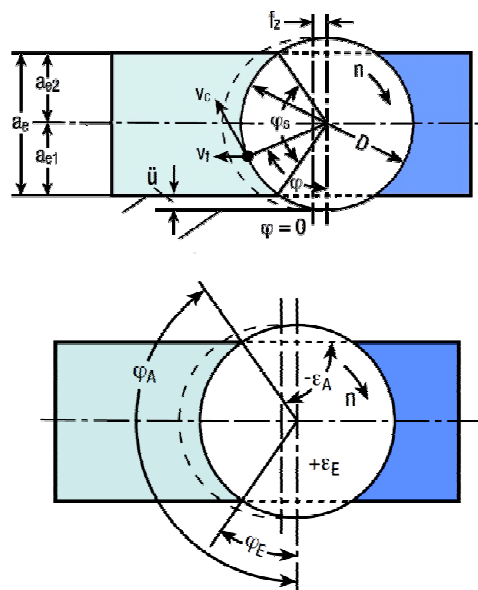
Contact conditions and geometry in face milling with workpiece [4]
